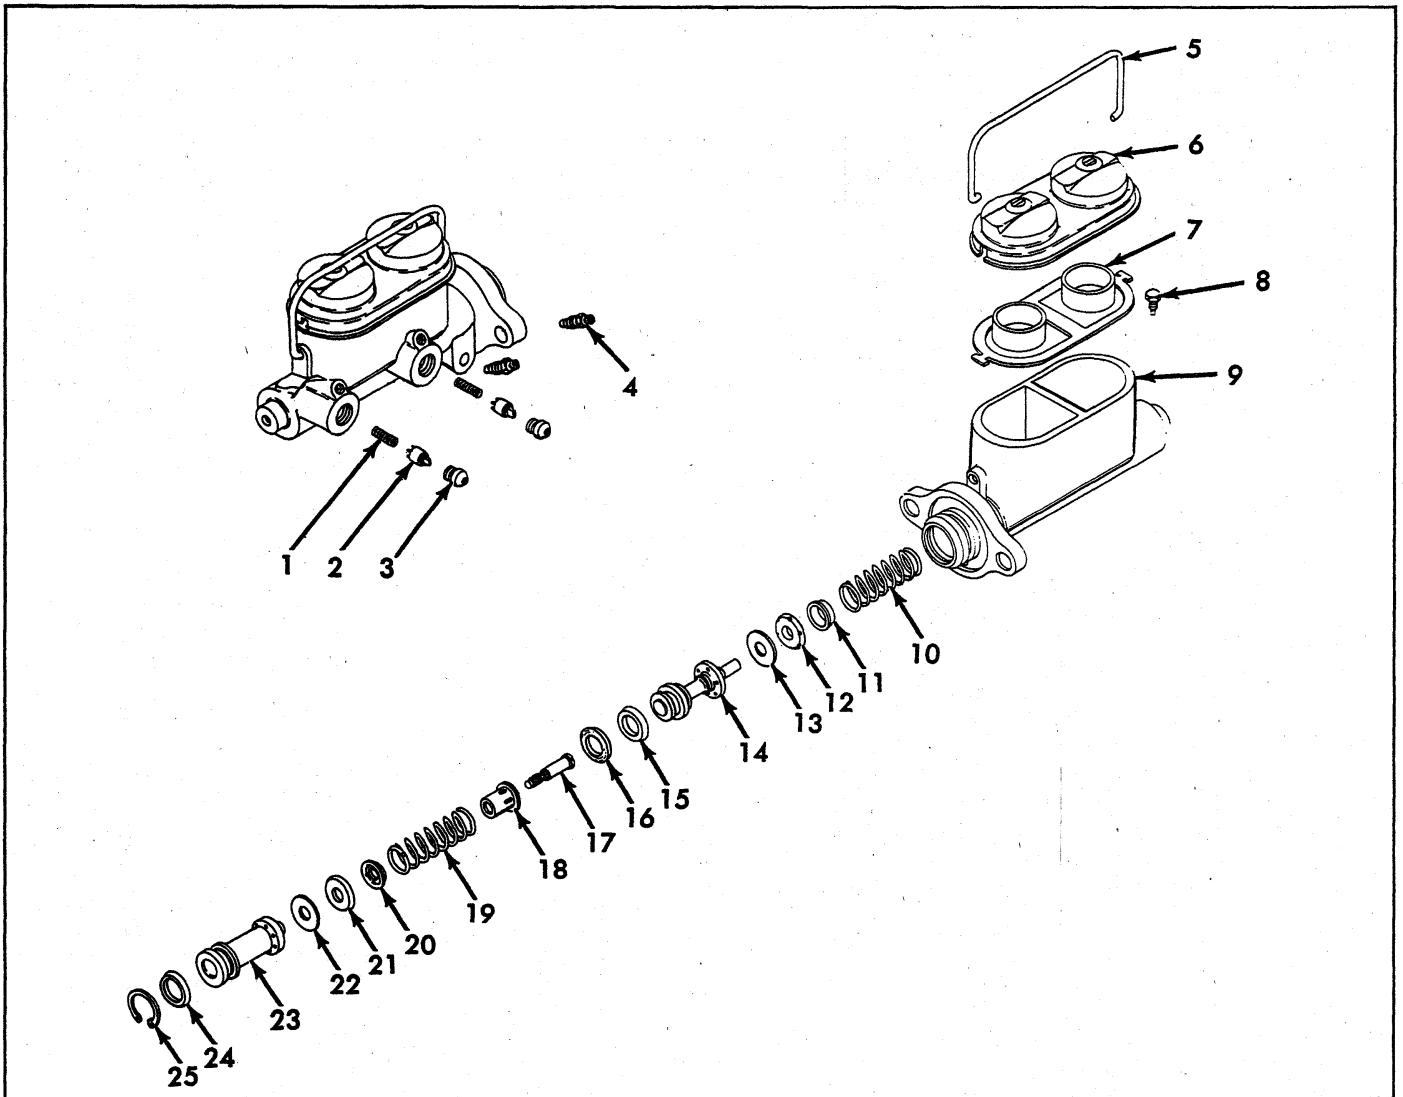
Main Cylinder for Drum Type Brakes—Exploded View
